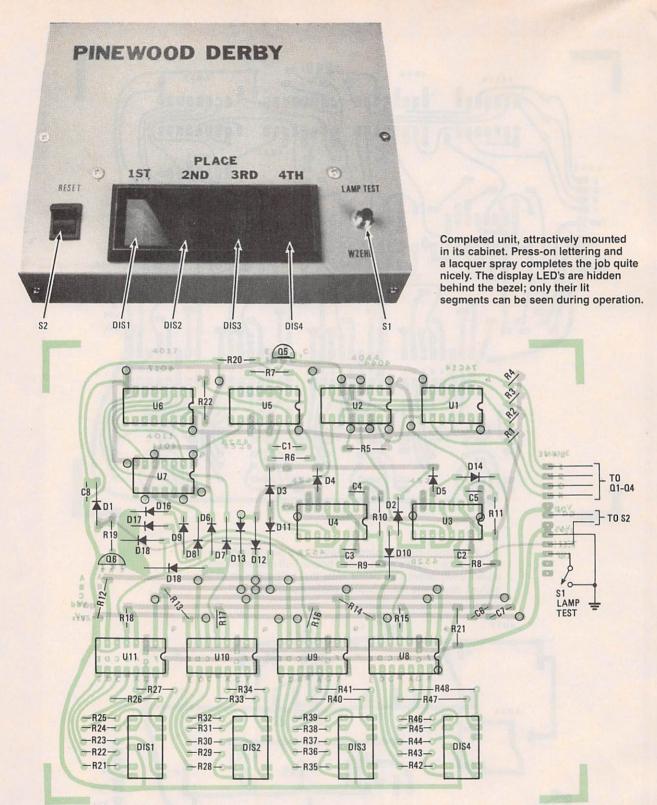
Parts placement for the main printed-circuit board. Note that some solder pads are marked with circles. Those are the ones that must be soldered through from upper foil to lower foil.
